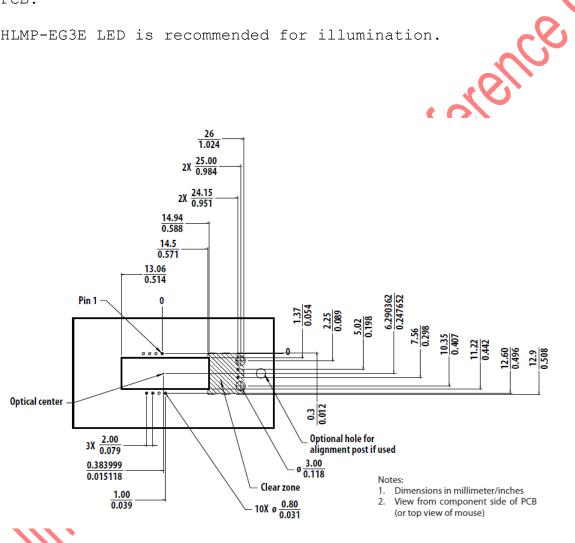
Recommended PCB Mechanical Cutouts and Spacing
